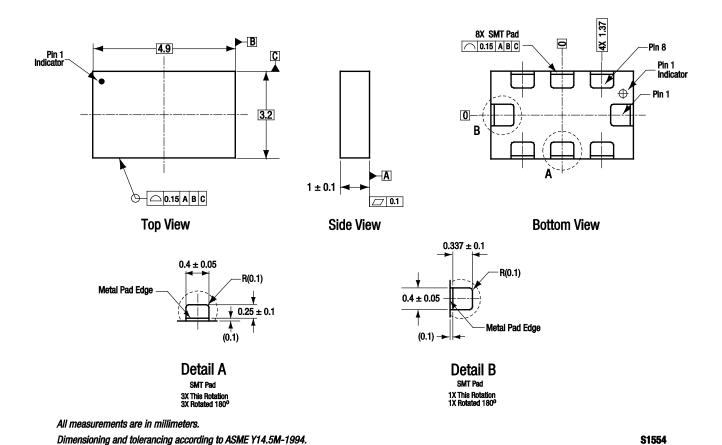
PS088-315 8-Pin MCM Package Dimensions
